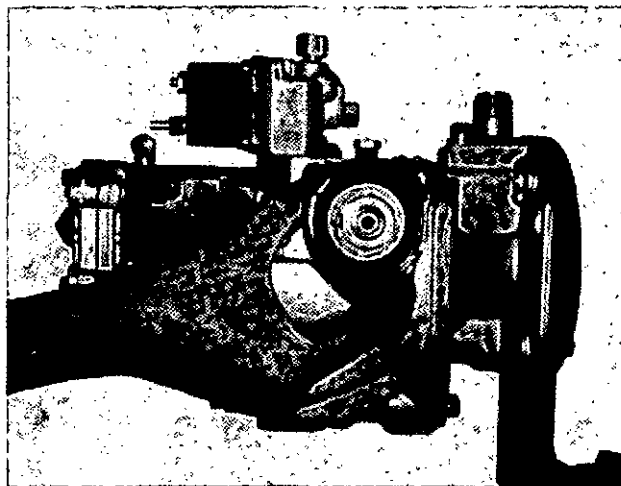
, (F5302). Remove the AFC bellows and piston assembly.
